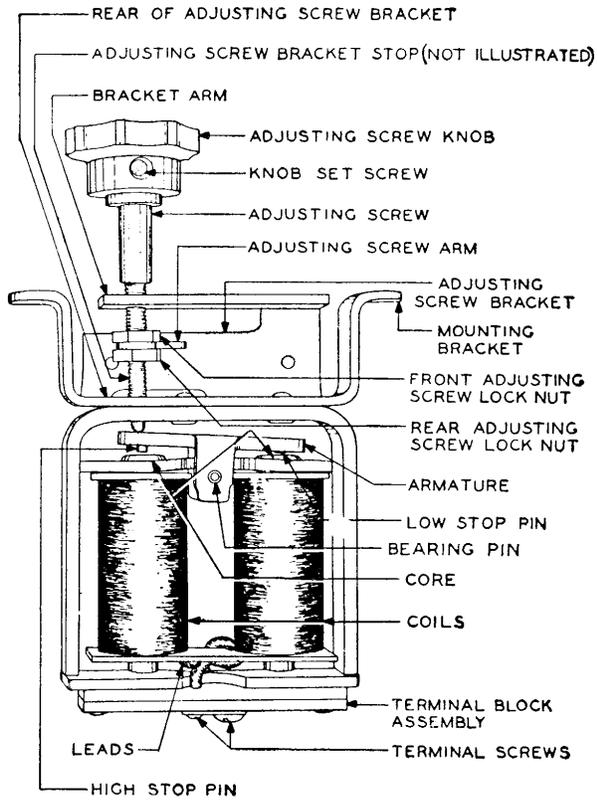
8-type Buzzer Equipped With an Adjusting Screw Arm
